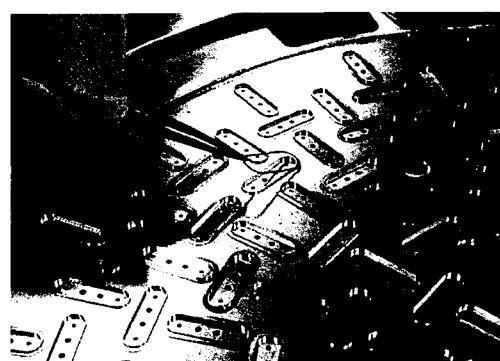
Appearance of filler metal setting by spot welding before brazing
